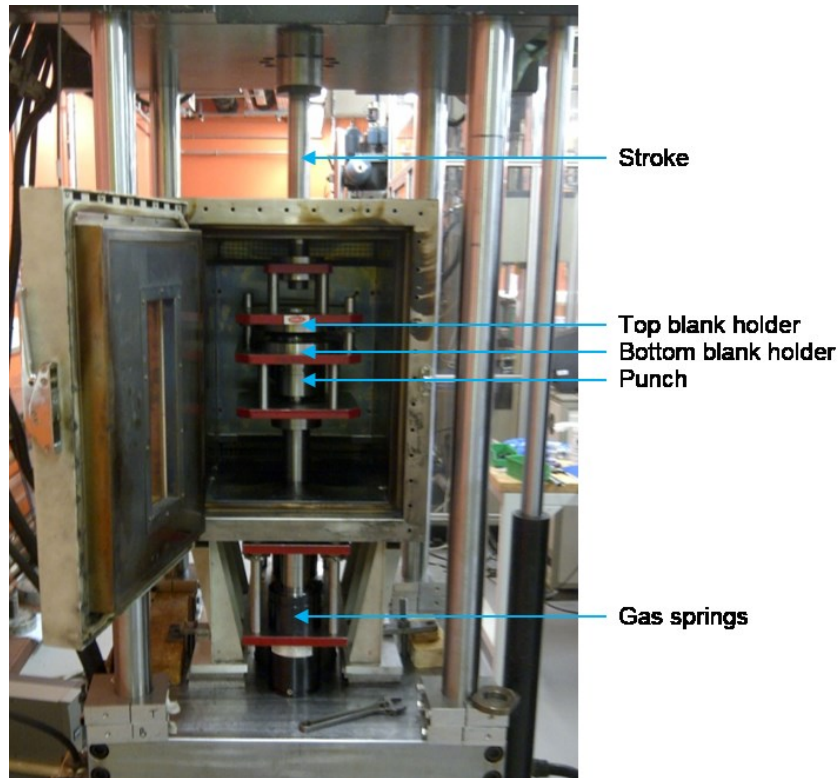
Press machine and tools used for the dome forming test(Elfakir, 2015).
